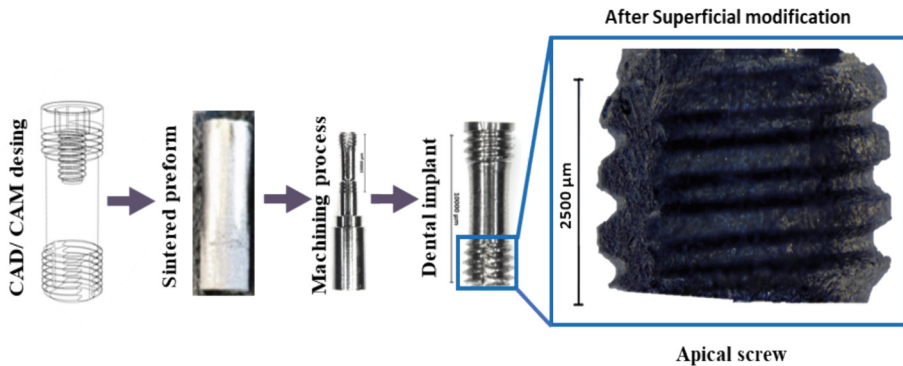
Overview of dental implant manufacture from CAD/CAM design, sintered cylindrical preform to final micromachined dental implant, and surface modification of the apical zone of the dental implant.
